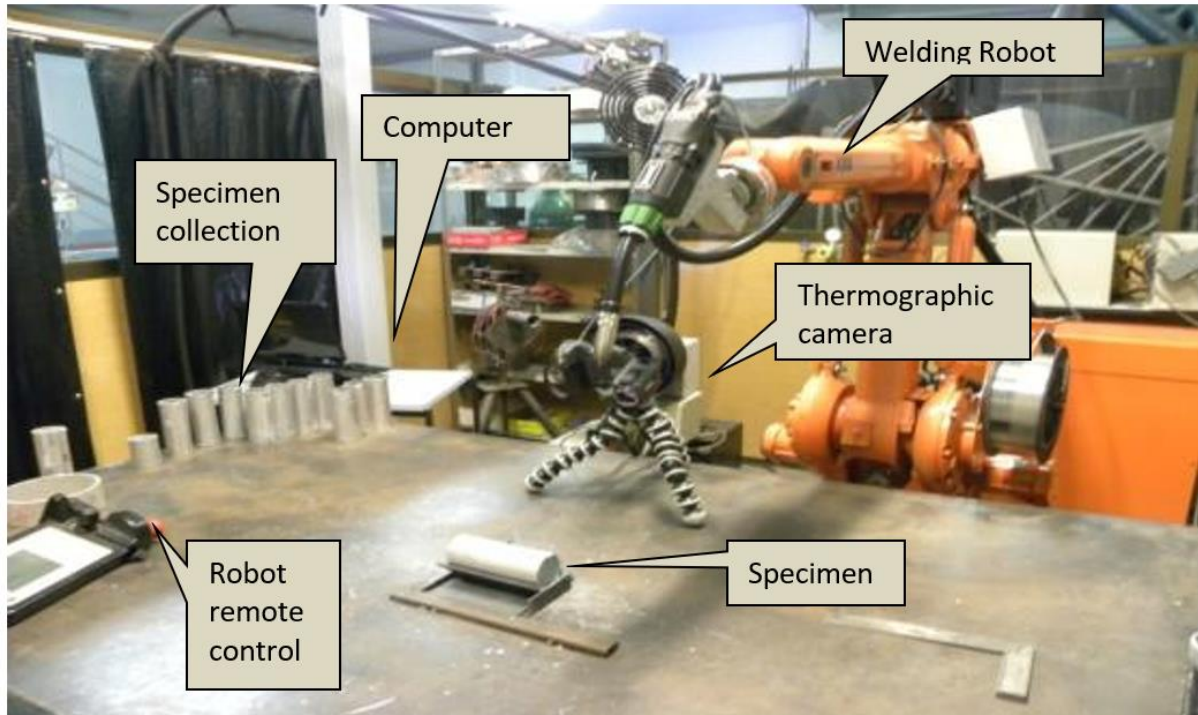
Scheme of the power source, welding arm, and thermal camera.
